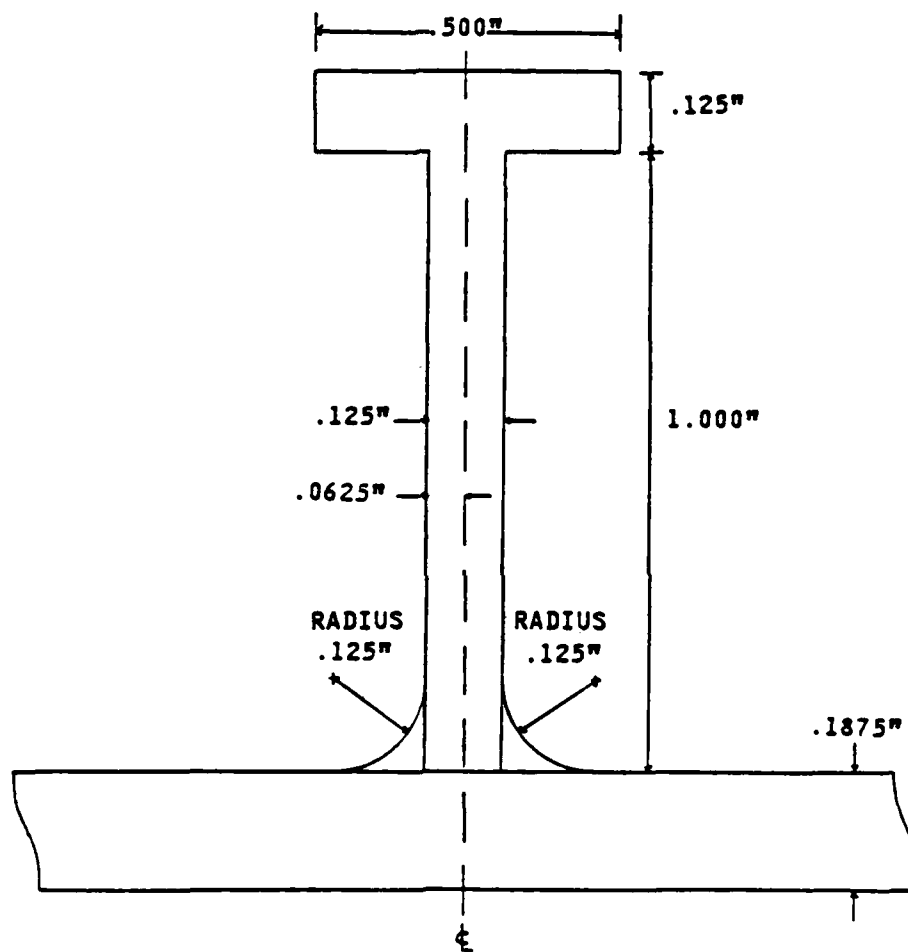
Wide Flanged "T" Stiffener Cross-Section
